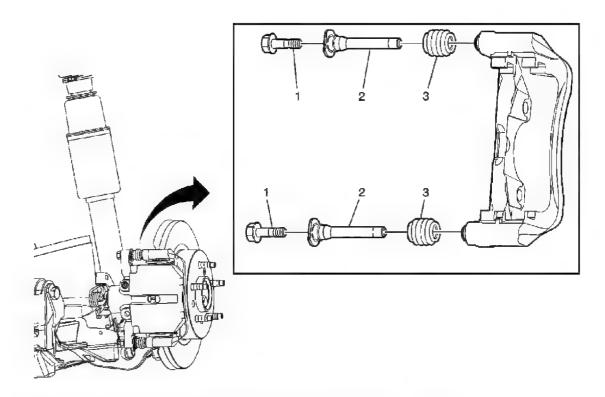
Replacing Rear Disc Brake Hardware - (JL9) Courtesy of GENERAL MOTORS CORP.
